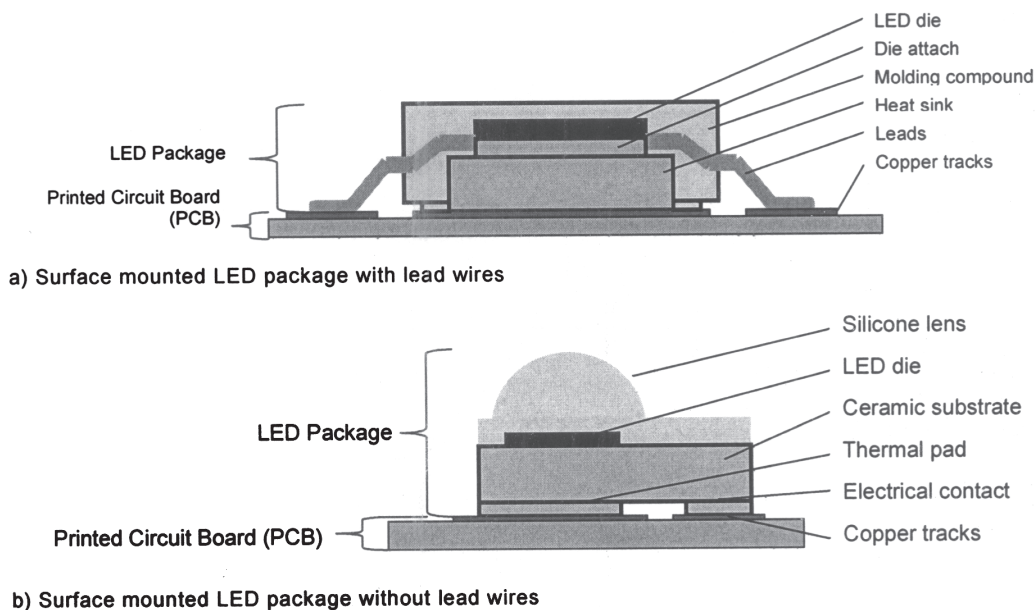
SCHEMATIC DRAWINGS OF LED PACKAGES
